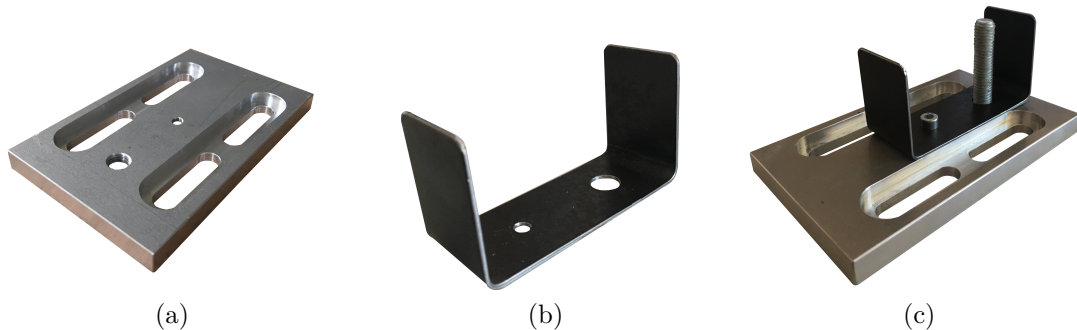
Platform designed to hold the biological specimens in the experiment: (a) bottom slab showing the two holes and sliders; (b) the U-shaped part for further fixation; and (c) the complete assembly.
